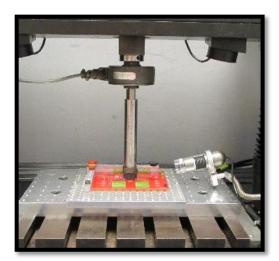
Compliant Pin Insertion Force Test Setup – Header PCB
